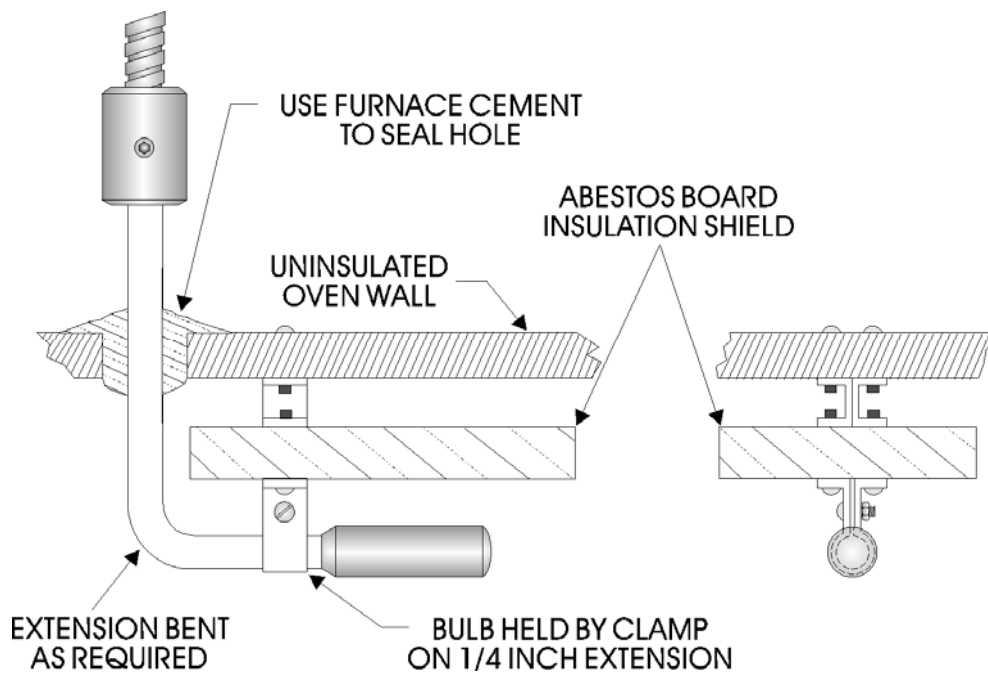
Plain Bulb Parallel to Chamber Wall
